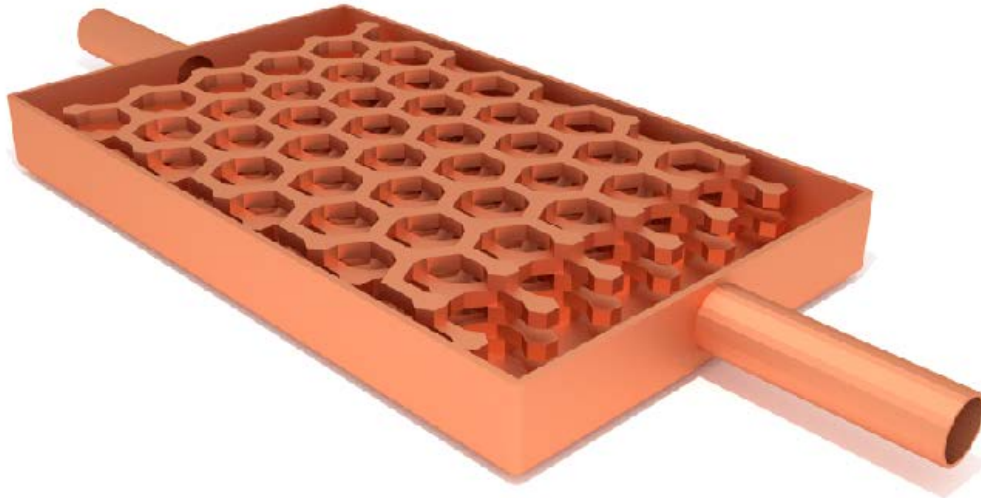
Megware CPU heatsink design with layered honeycomb pattern
